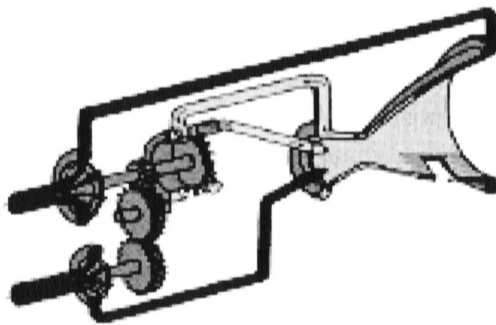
The original patent drawing of Sängers rocket motor. Credit: HES.
